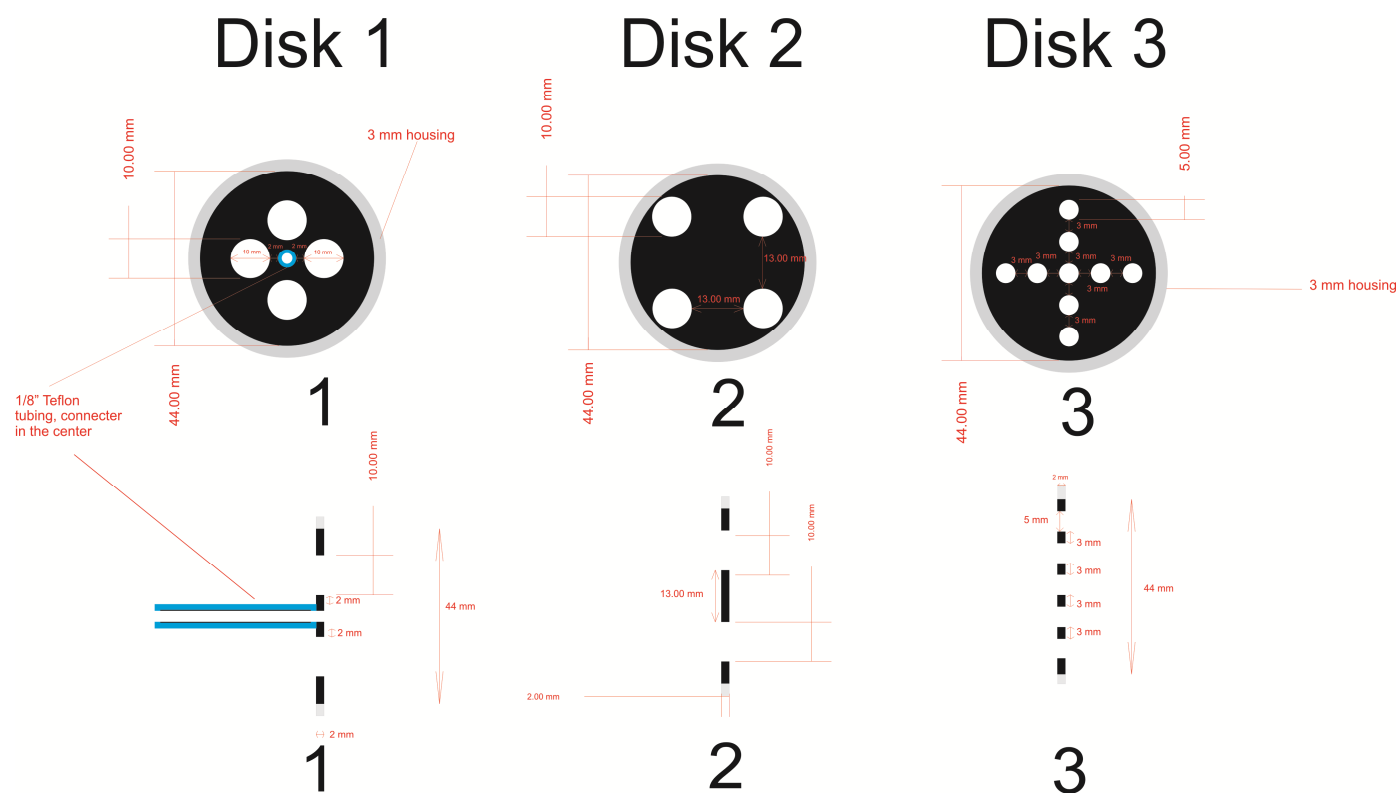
Detailed design schematic of the three disks, mounted inside the housing of the movable mixing plunger
